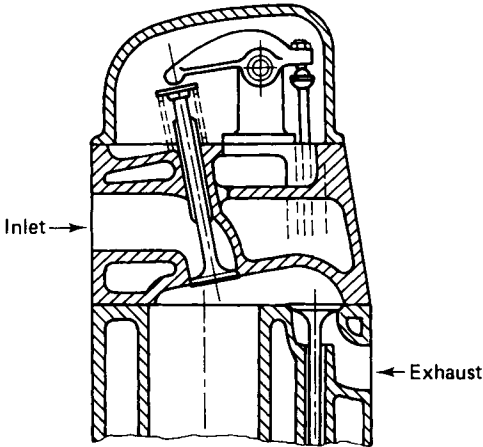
F-head engine with overhead inlet and side exhaust valves
